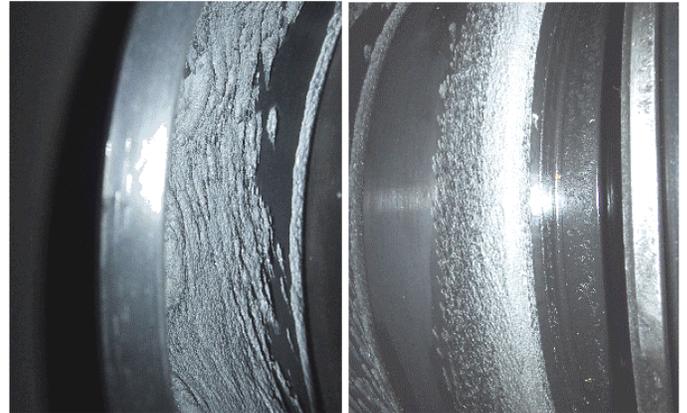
Disassembly of the of the re-injection compressor: Evidence of corrosion/erosion in the first stage impeller (photo taken from inlet side of the impeller)
